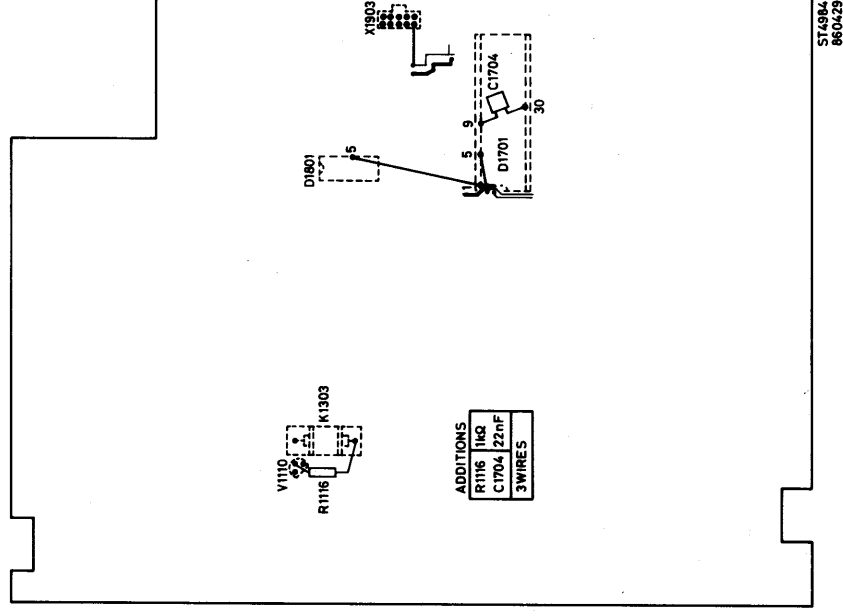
Additional components conductor side main pcb (PM2534 version)
